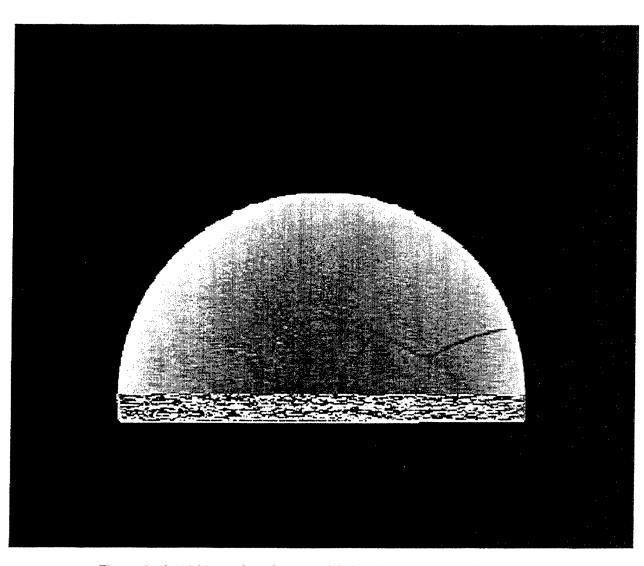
10.90 mm from bottom of disk with 65° rotation about X-axis.
